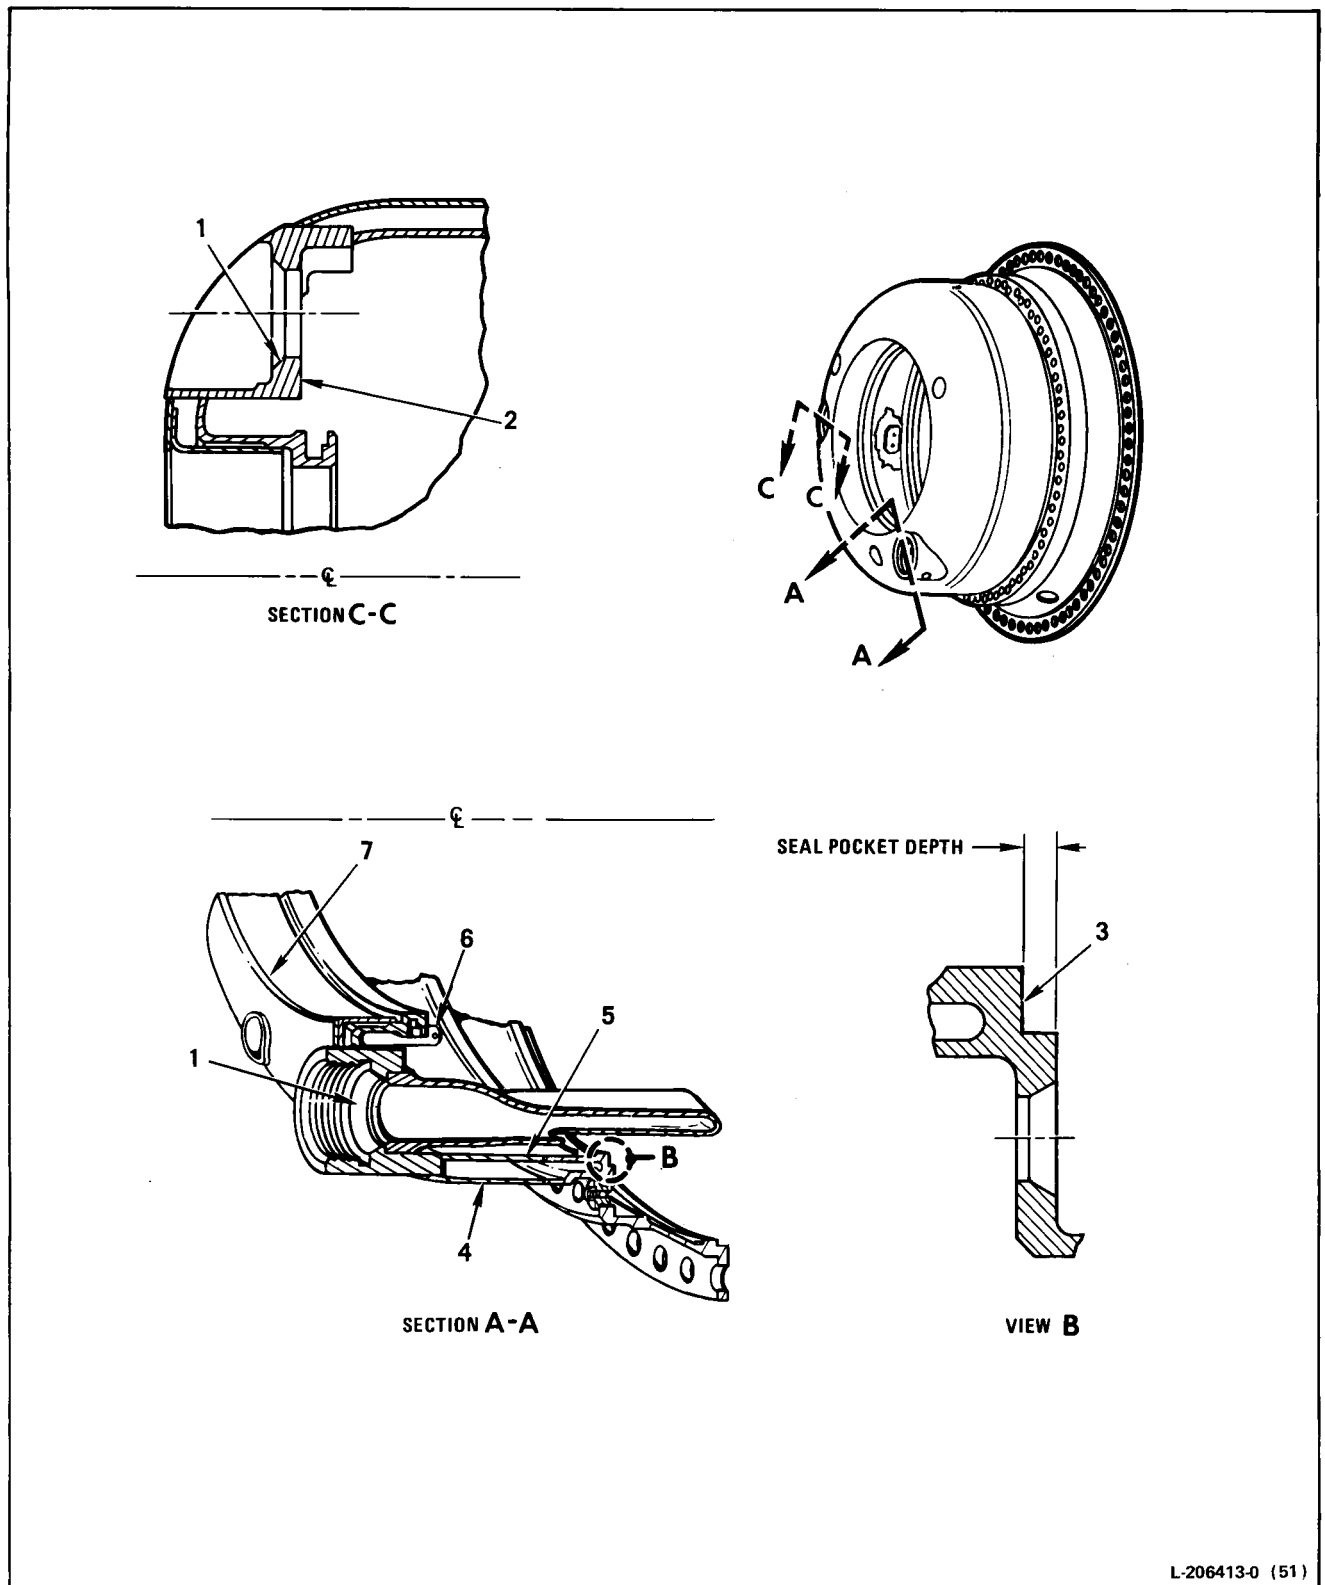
No. 4 Bearing Seal Support Assembly - Blend Repair
